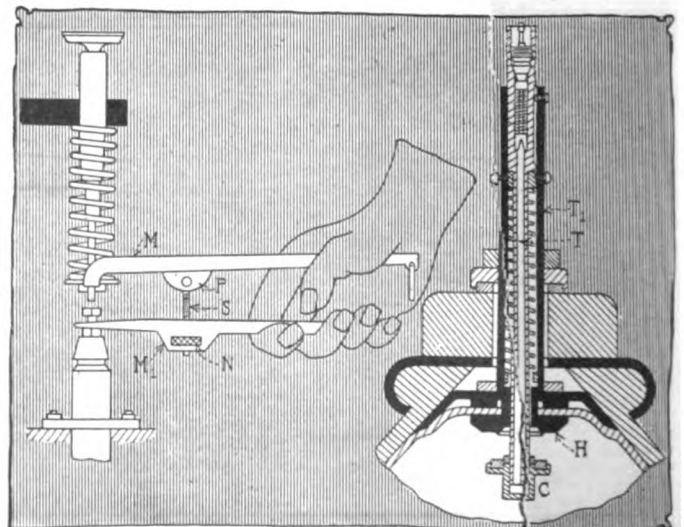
Pillines spring compressor. Fig. 4—Schweinert valve
